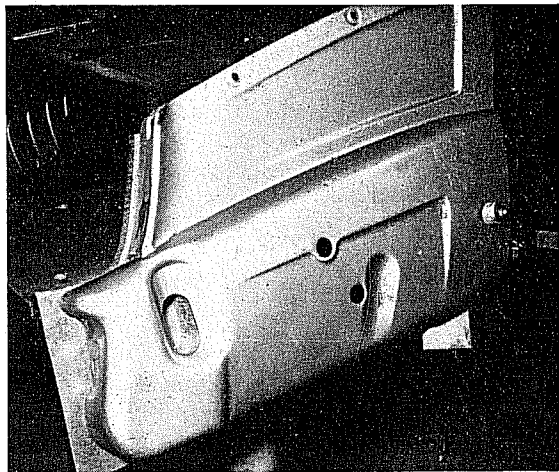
(right).—Gas-welding operations on jiggged body pressings
